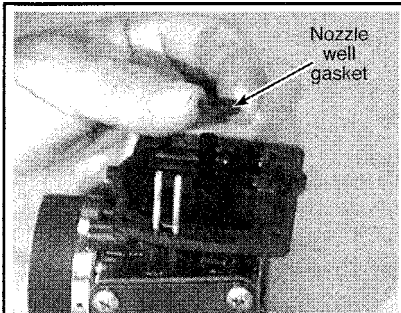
Slide the nozzle well rubber gasket off the tube in the carburetor base
